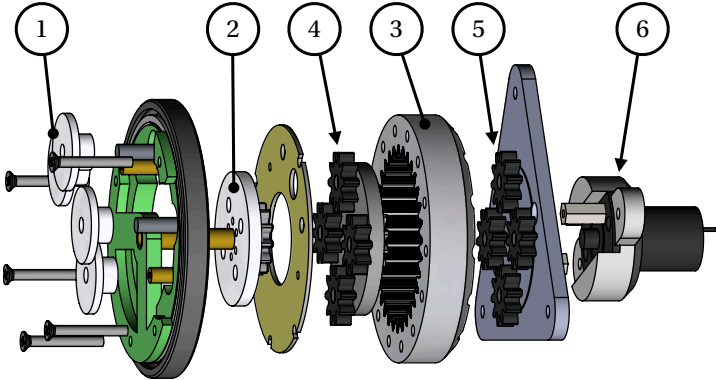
Exploded view of the Gearbox B design (motor not shown). The labels correspond to the labels of the exploded view in Figure 4.1.
